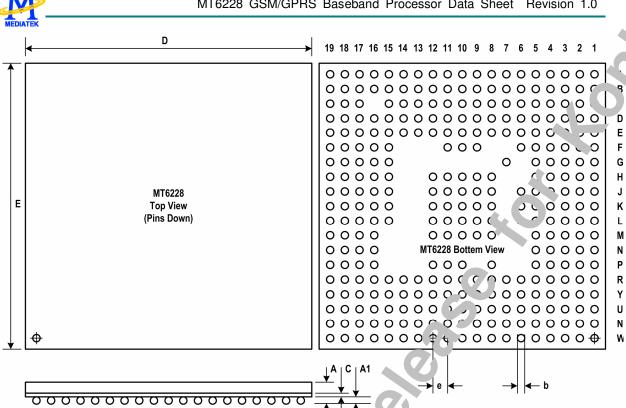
Outlines and Dimension of TFBGA 13mm*13mm, 314-ball, 0.65 mm pitch Package
